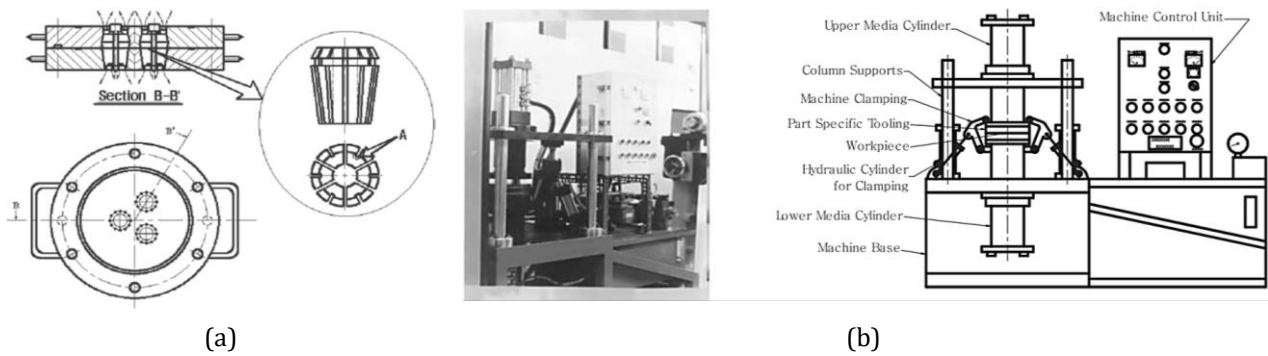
(a) Deburring process of spring collet and (b) AFM system [14].
